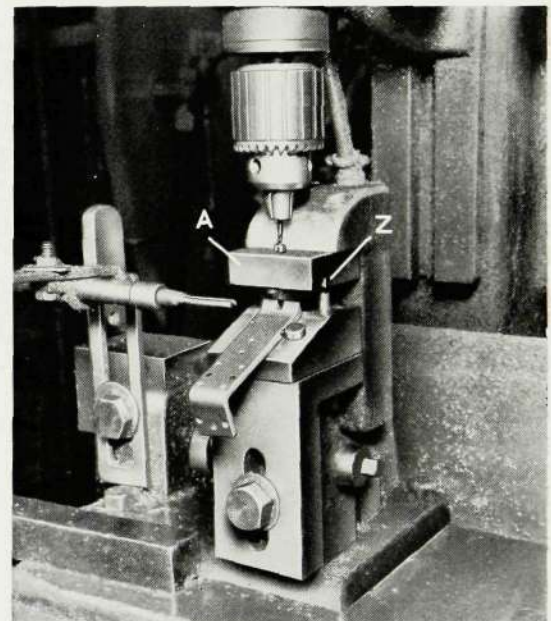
With the simple pedal-operated fixture here shown, the inclined holes are drilled in 390 yokes an hour
